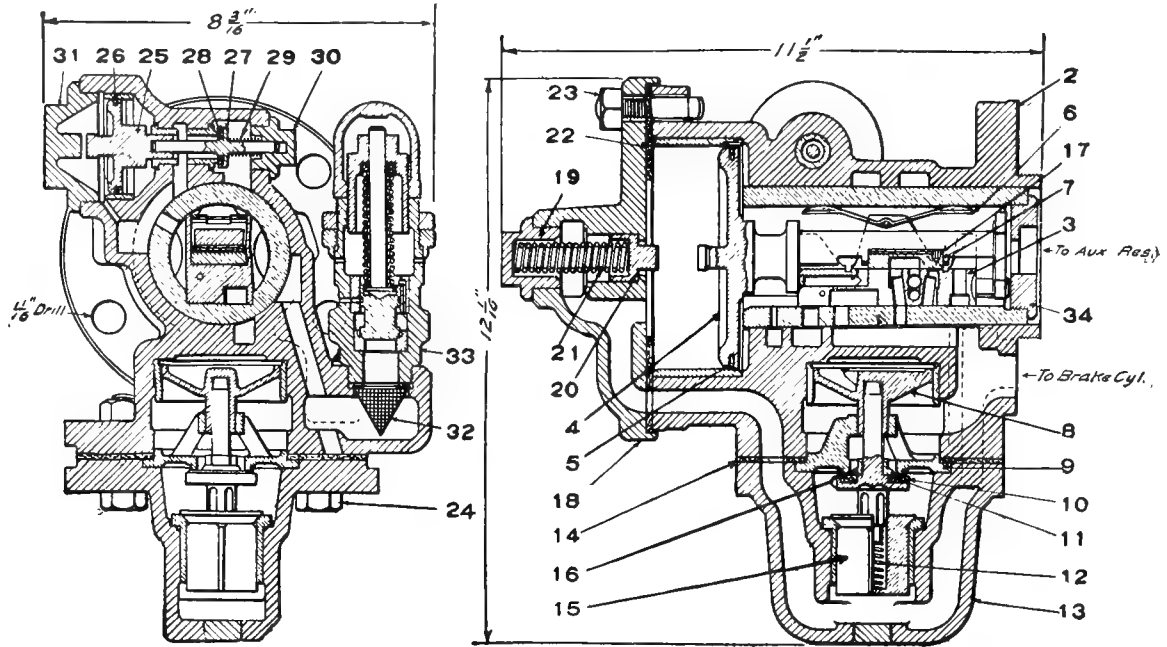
Quick Action Pipeless Triple Valve, L-3. Used with 16 and 18 in. Passenger Brake Cylinders.
